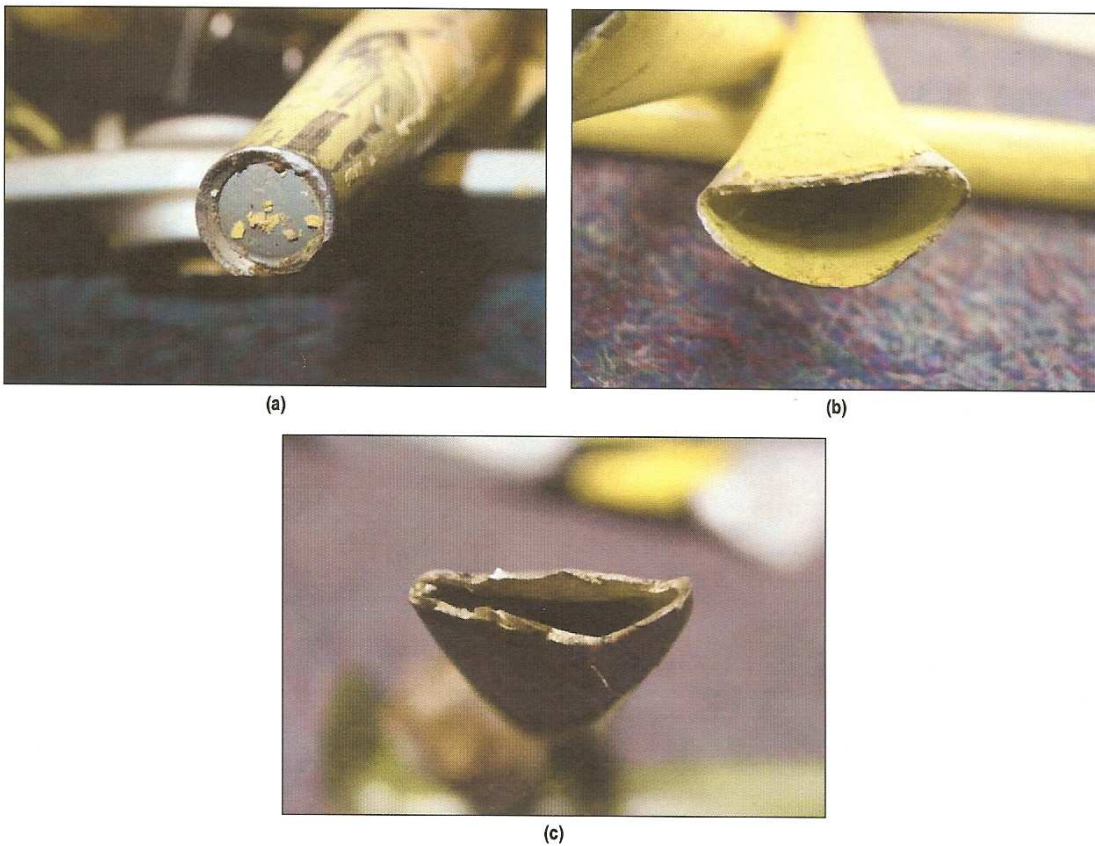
Enlarged views of the connecting rod fracture surfaces: (a) magnification: 2x; (b) magnification: 1x; and (c) magnification: 1,9x.
